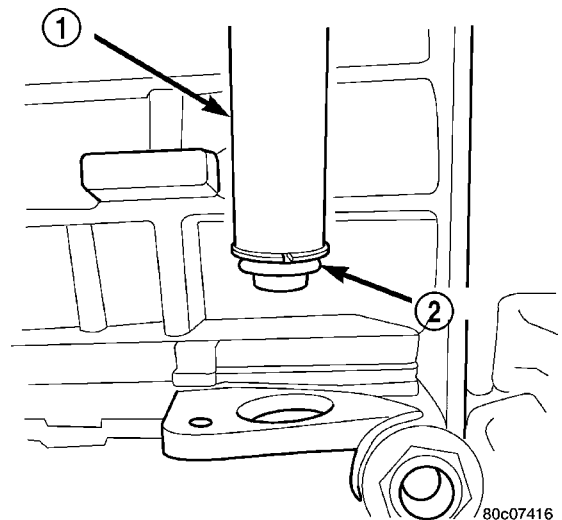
Install Dipstick Tube Seal Using Tool 8254
